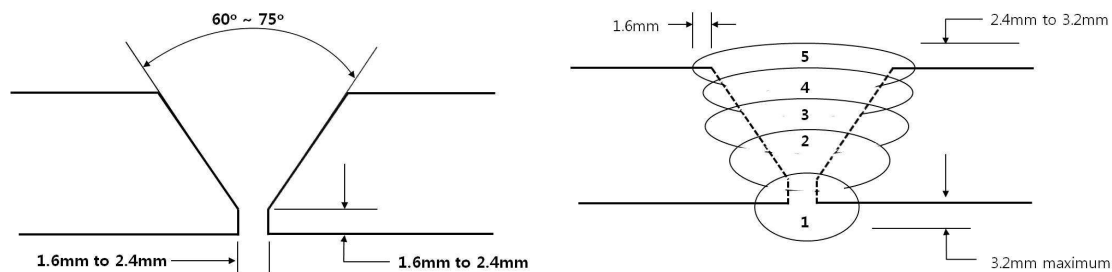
Typical Joint design and welding passes [3]
